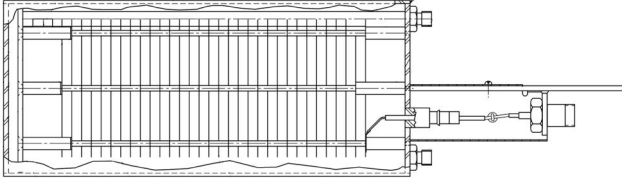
Cutaway view of a PIC. The housing is a stainless-steel cylinder with a 114-mm outer diameter and a 270-mm length. The 32 plates each have an area of 56.5 cm<sup>2</sup> and are 6.35 mm apart. The plates are alternately grounded or connected to a bias voltage.
